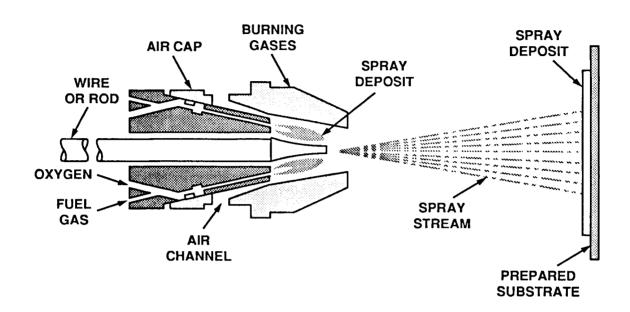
WIRE FLAME SPRAY GUN CROSS SECTION
